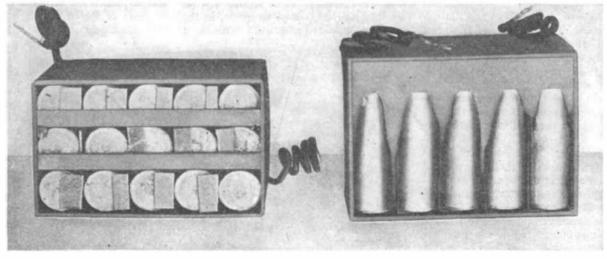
The side and bottom of a completed battery were removed to show the construction
